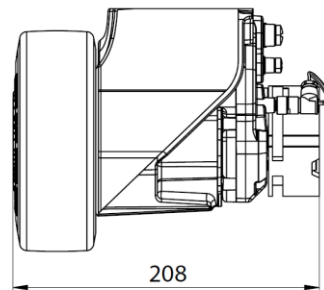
Overall dimensions – ‘SWD® 150 2-stages’ with external brake
